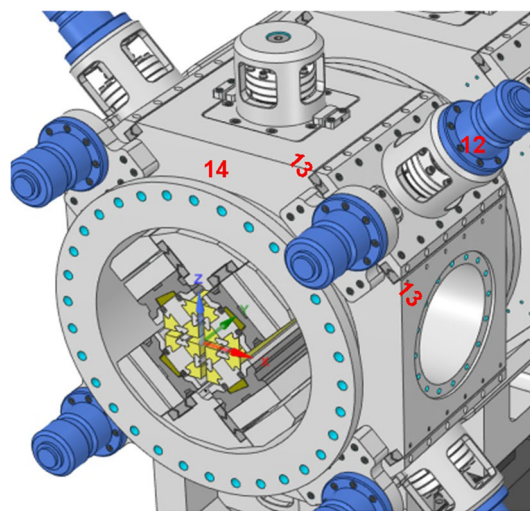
Vacuum chamber with radial and phase actuation mechanism
